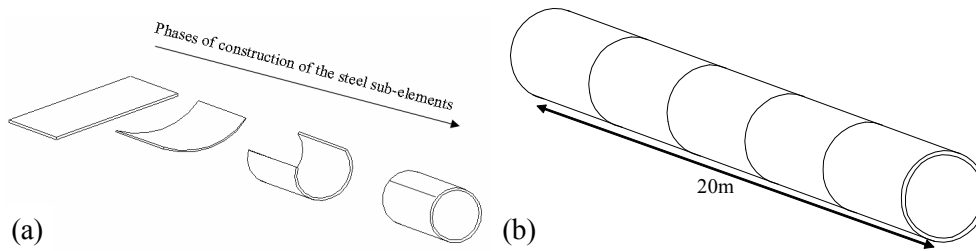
The construction of the steel tube: (a) sub-element; (b) the complete module.
